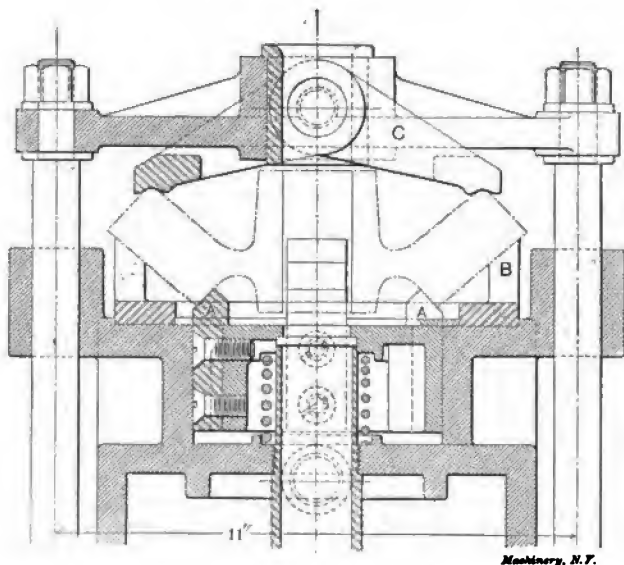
Pneumatic Clamping Jig used for Drilling Sprocket Wheel
